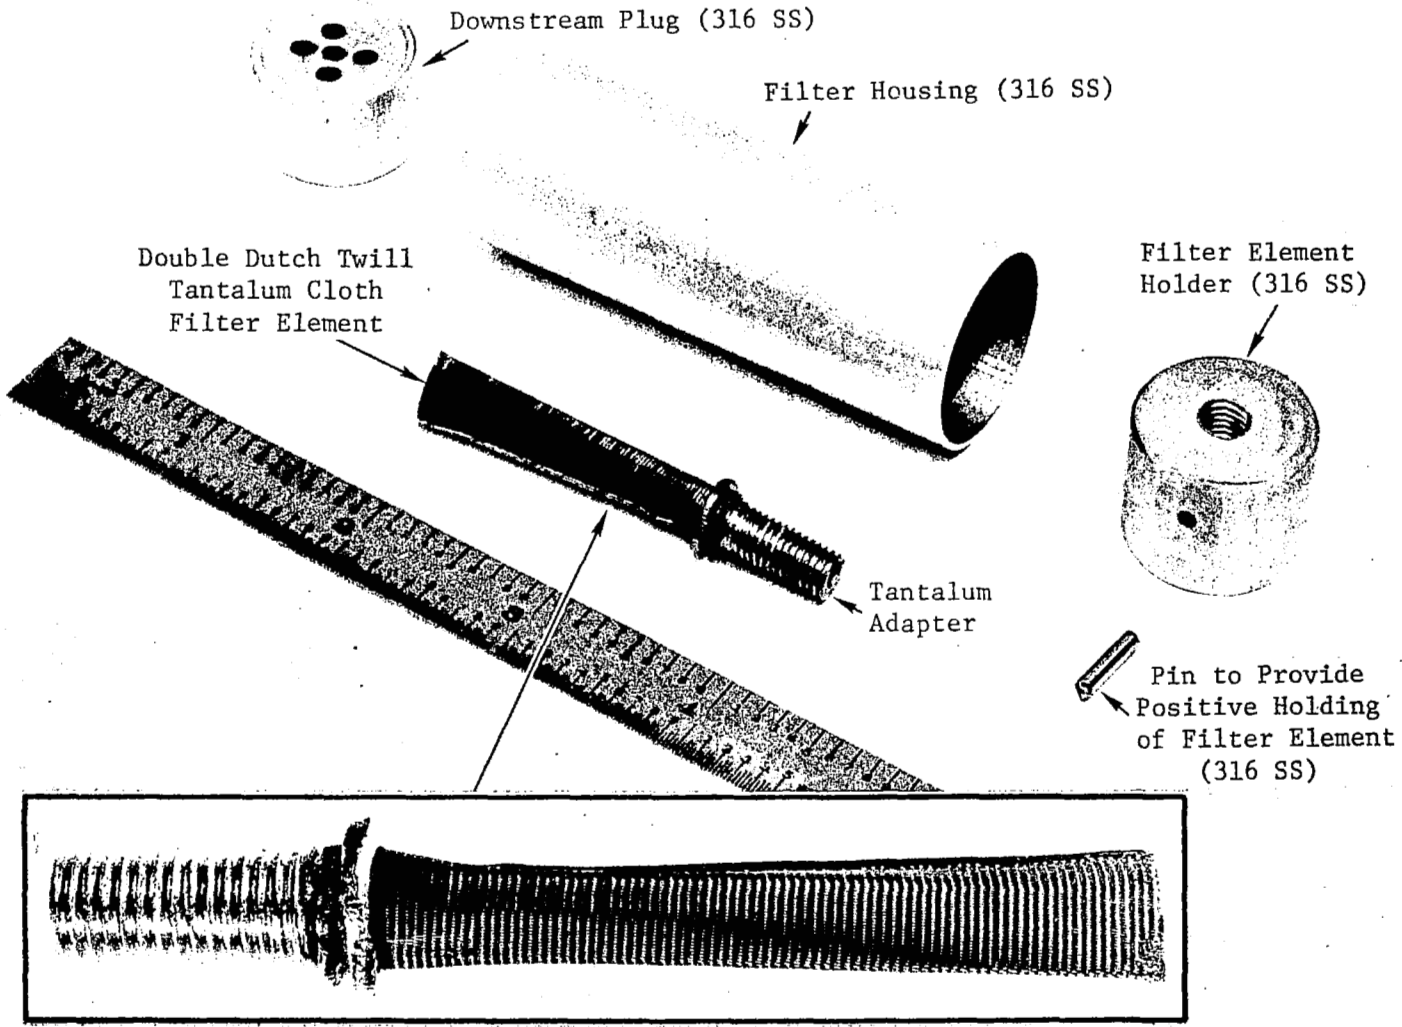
Tantalum Screen Filter Prior to Assembly. (C68062804)
